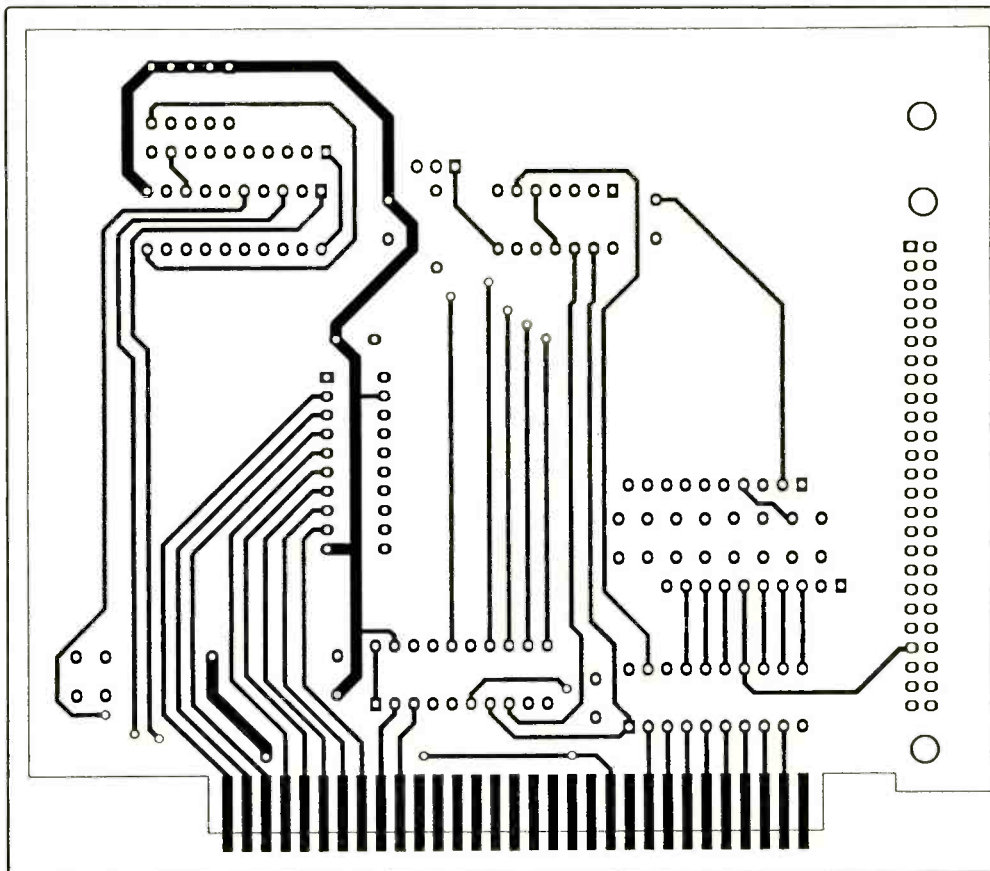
Actual-size fabrication guides for double-sided Interface printed-circuit board.
